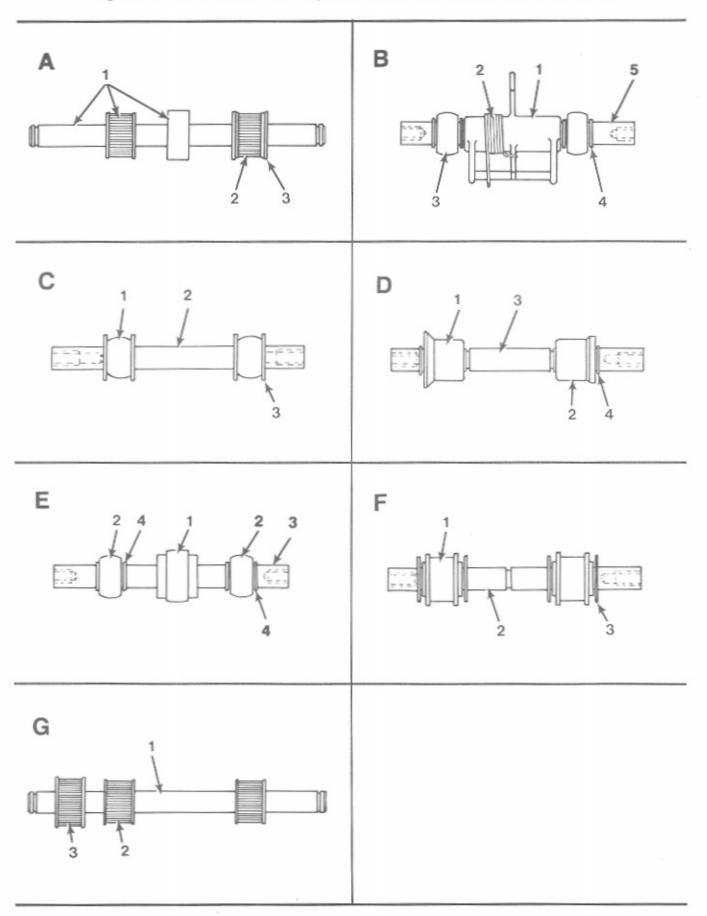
8. OBA-2 Transport Assembly (Sheet 3)
